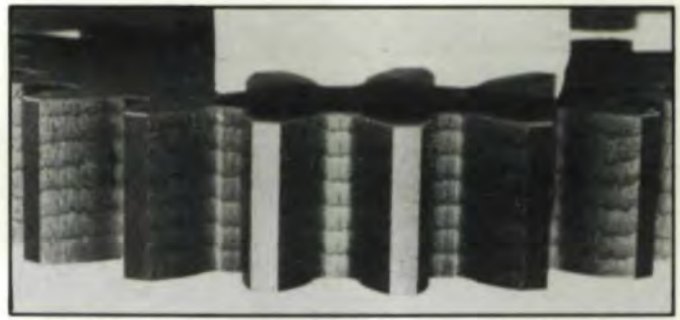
Hobbed finish of left-hand gear in Fig. 6 as produced by a 4-in. dia., 10-flute, single-thread hob rotating at 71-rpm and fed at 0.150-in. per revolution.
